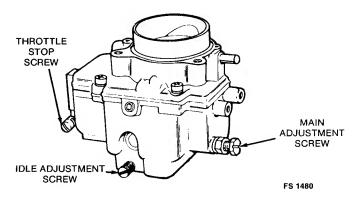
MIXTURE SCREW ADJUSTMENTS (BFA, BGA, NH)
